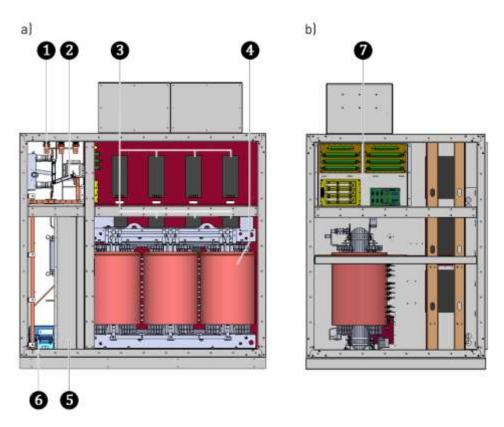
ACC-AuCom Compact Cabinet a) Rear view
